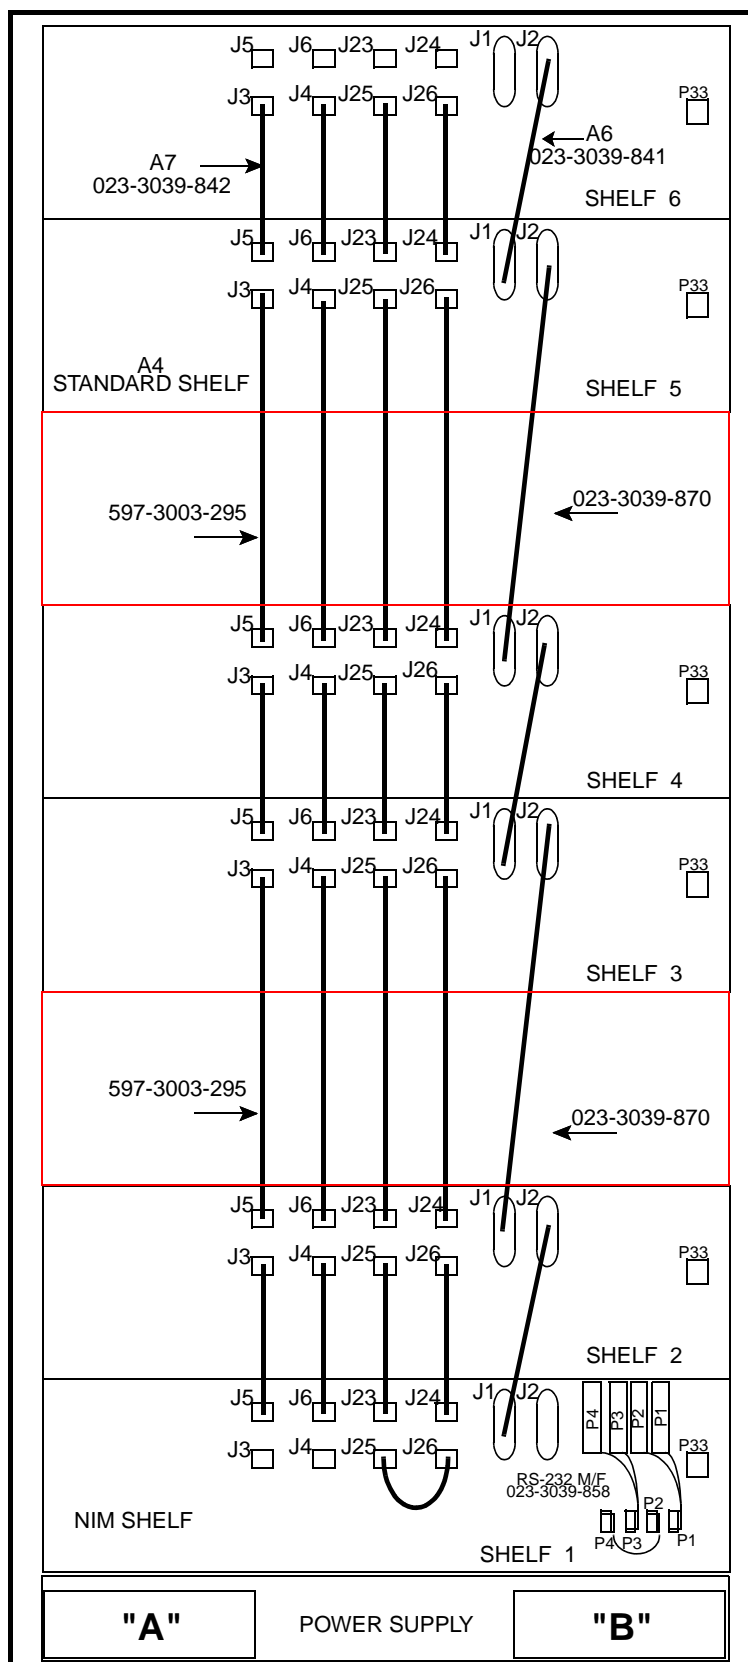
6-SHELF SWITCH BACKPLANE CABLES
